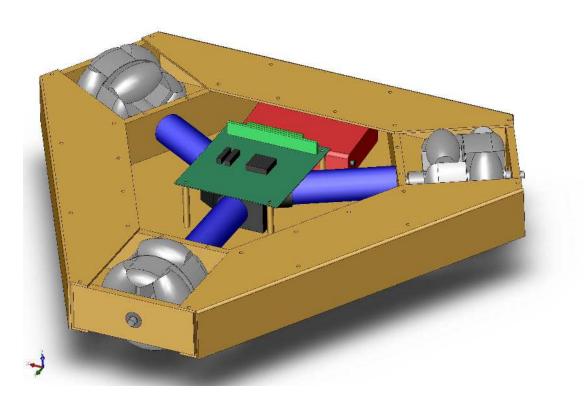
3D CAD drawing of the assembled omnidirectional base
